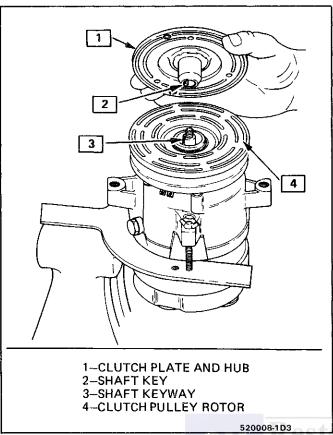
Shaft Key, Clutch Plate/Hub Installation
